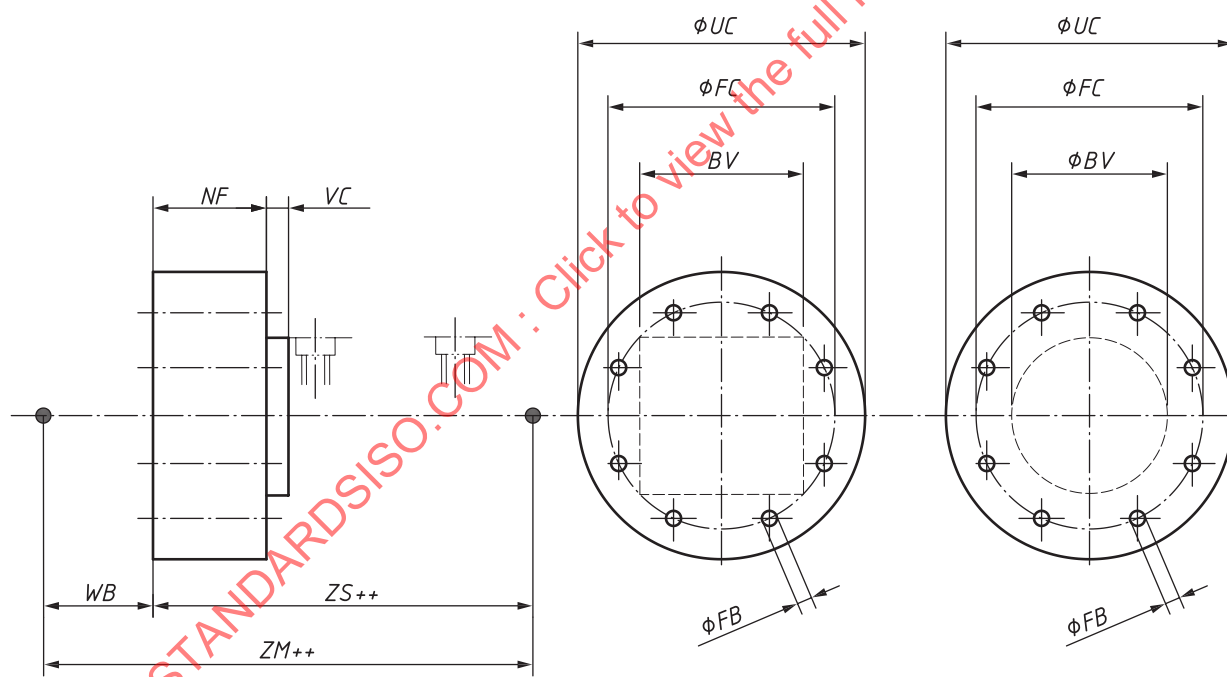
MDF7 — Head, circular flange centred on the rear side — Double rod
